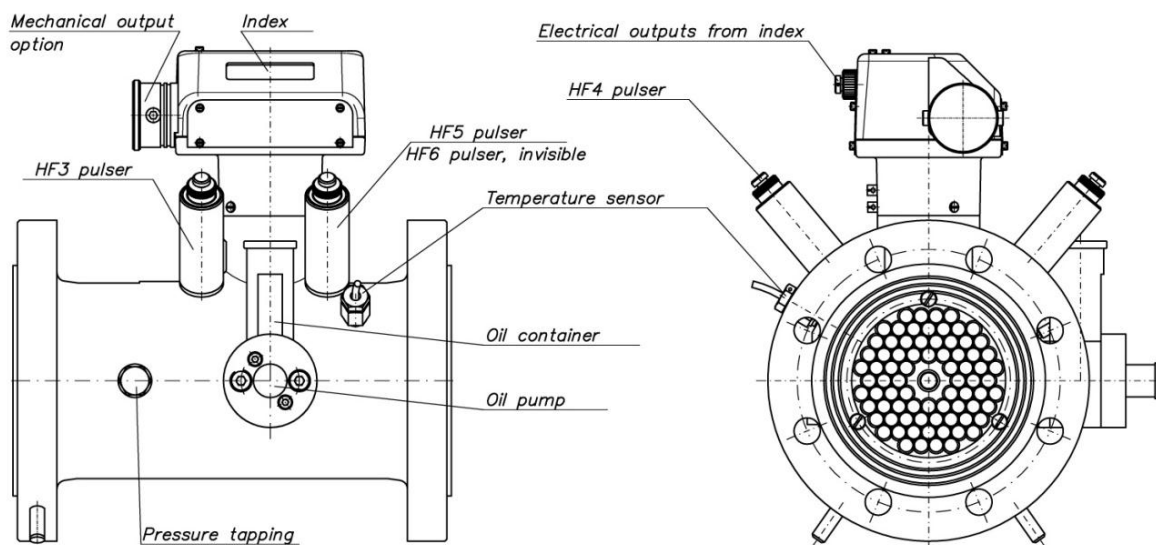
Location of measurement outlets in CGT-02 gas meters.
